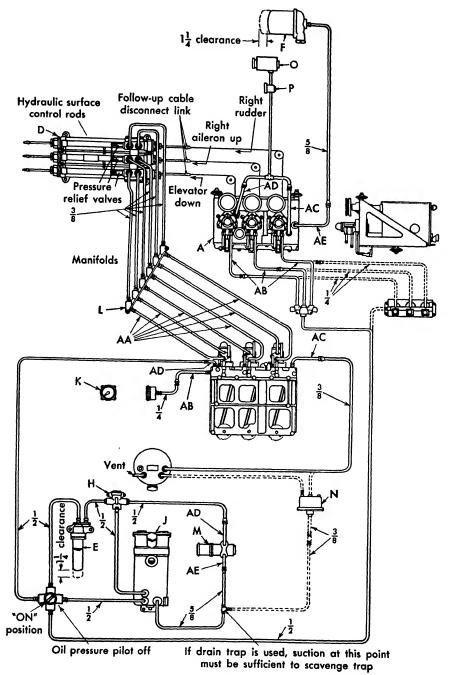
A drawing of the installation of the automatic-pilot equipment. (Courtesy Jack & Heintz, Inc.)
